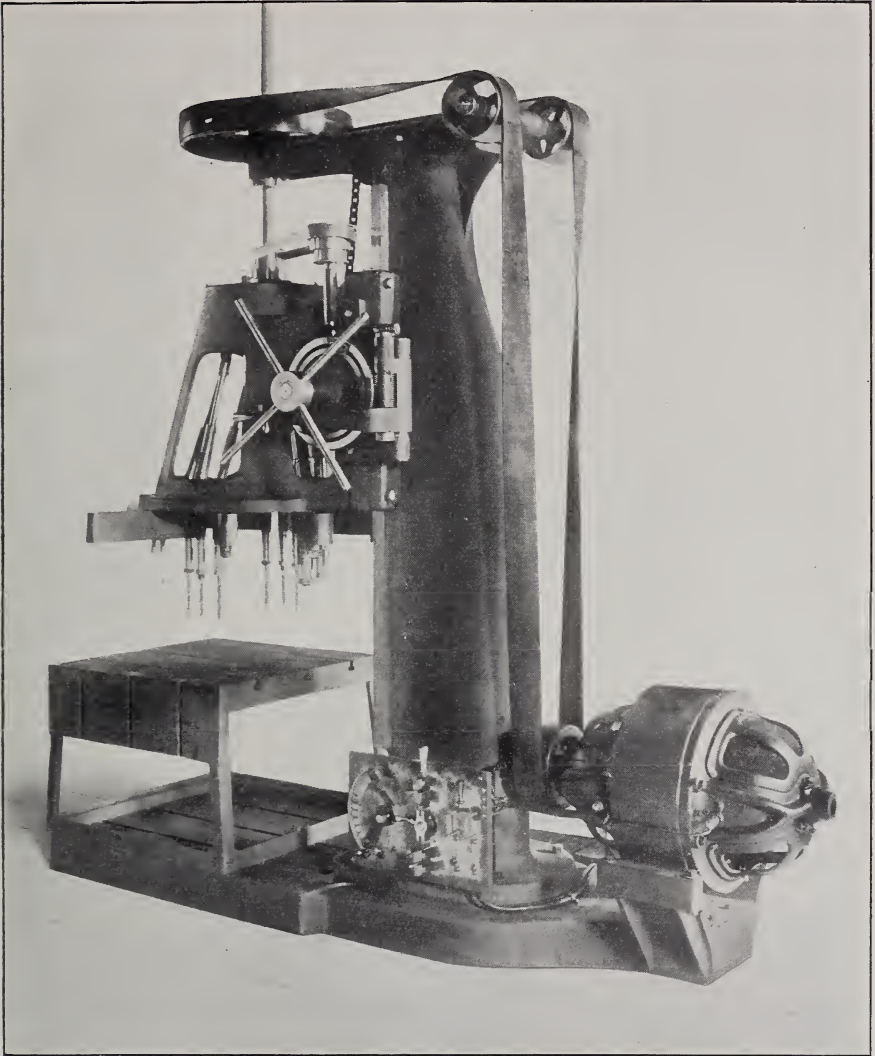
A VARIABLE-SPEED MOTOR MADE BY THE COMMERCIAL ELECTRIC COMPANY, INDIANAPOLIS, IND., DRIVING A MULTIPLE SPINDLE DRILL MADE BY THE WESTERN MACHINE CO., HOLLAND, MICH.
